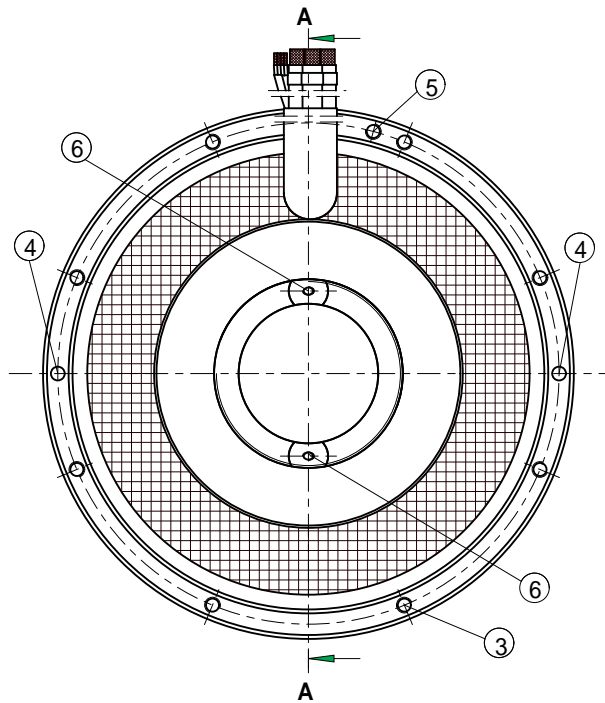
1MB 242 frameless spindle motor - dimensional data (part 1)
